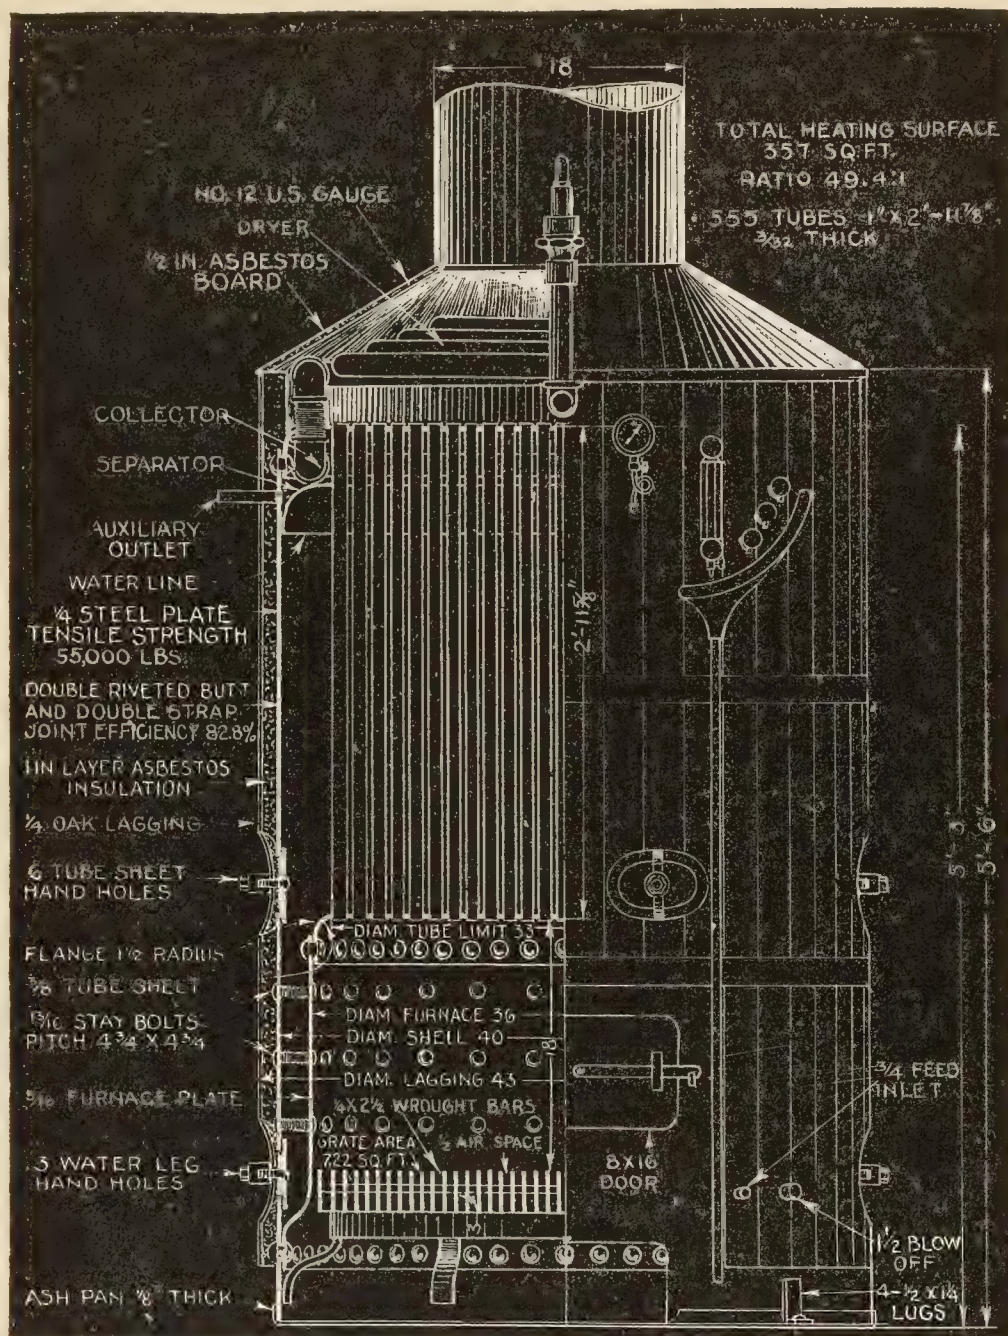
,705.—*Graham through tube vertical marine boiler.* Sectional view showing principal dimensions, separator, collector and dryer, light weight built up grates, covering, etc. The oak lagging secured by metal bands makes a neat covering, though Russia iron could be used instead. *The aim of the author* in designing this boiler was to avoid the faults of the ordinary vertical boiler, such as inadequate heating surface, large space required and excessive weight for power developed. Capacity about $2\frac{1}{2}$ times that of the ordinary boiler. Designed strictly in accordance with the requirements of the *A. S. M. E., Boiler Code.
